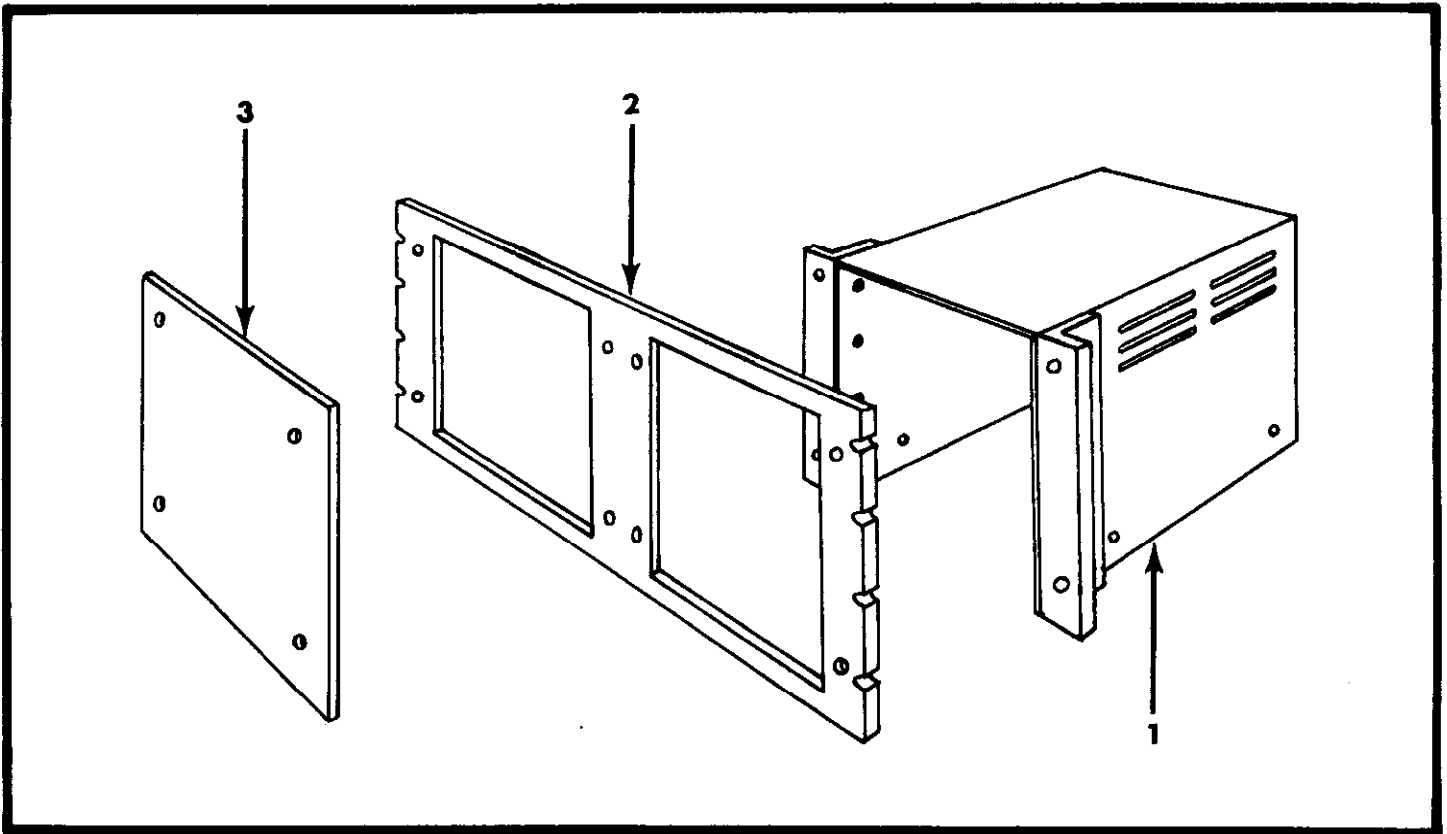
Exploded View of Model 4005 Rack Mounting Kit. Refer to Table 7 for parts list.
